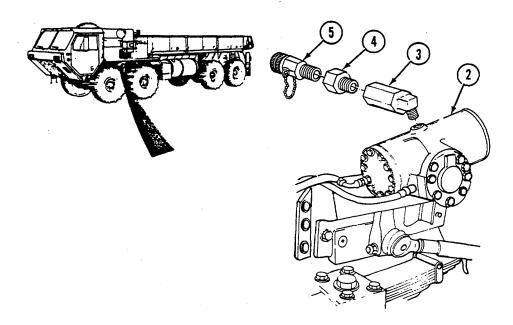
Slave Steering Gear Oil Sampling Valve installation.
